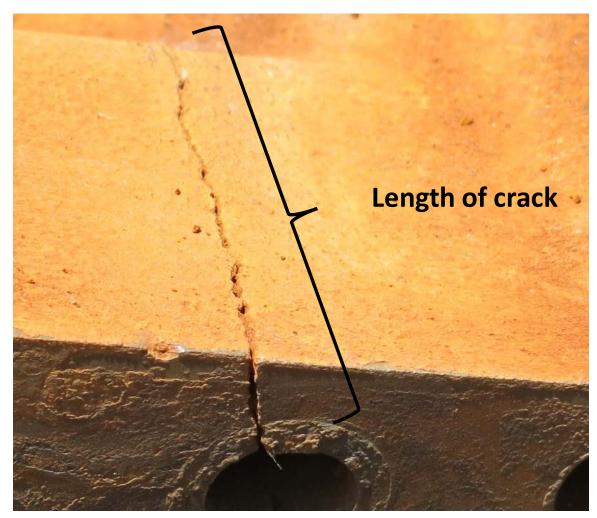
Closeup photograph of full thickness crack in starboard engine block at cylinder #5.
